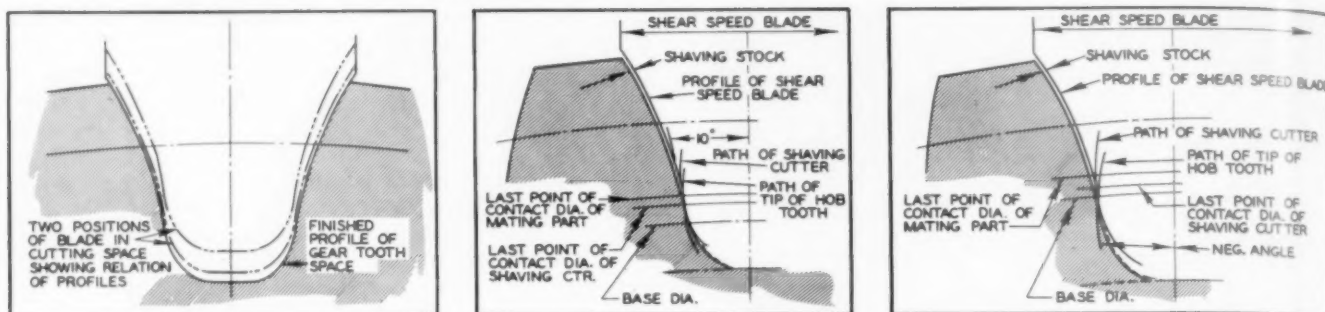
(left) illustrates the production of a definite involute form at a given tooth thickness. In Fig. 16 (center) is shown a layout made to indicate the outline of the finished gear tooth to obtain the required dimensions over pins. A second method of
